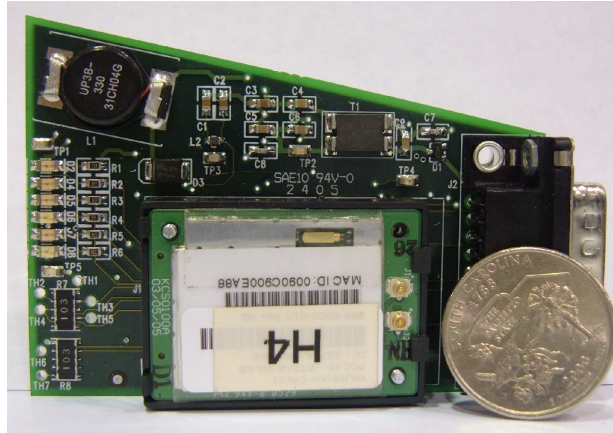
An external view of the DPAC 802.11b Wireless LAN Module mounted on our custom designed circuit board.
